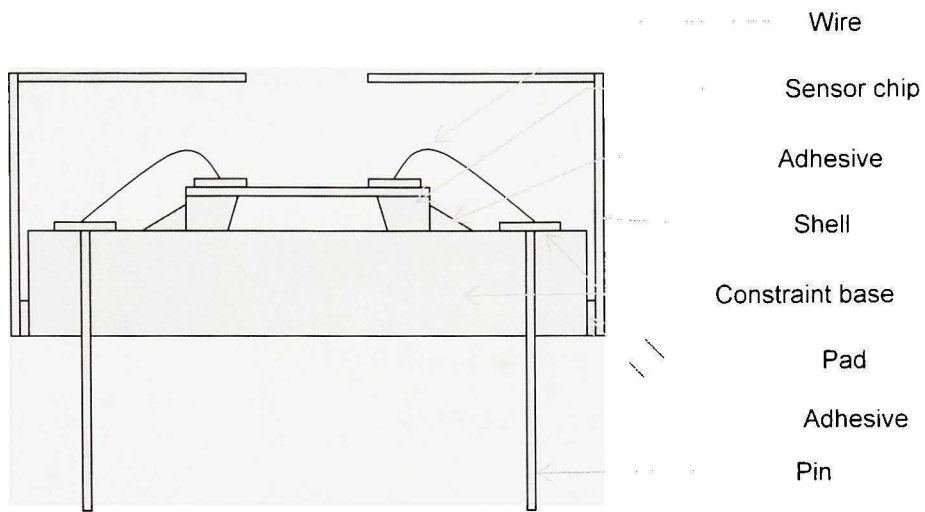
Side view of prototype 1 (conventional package prototype).
